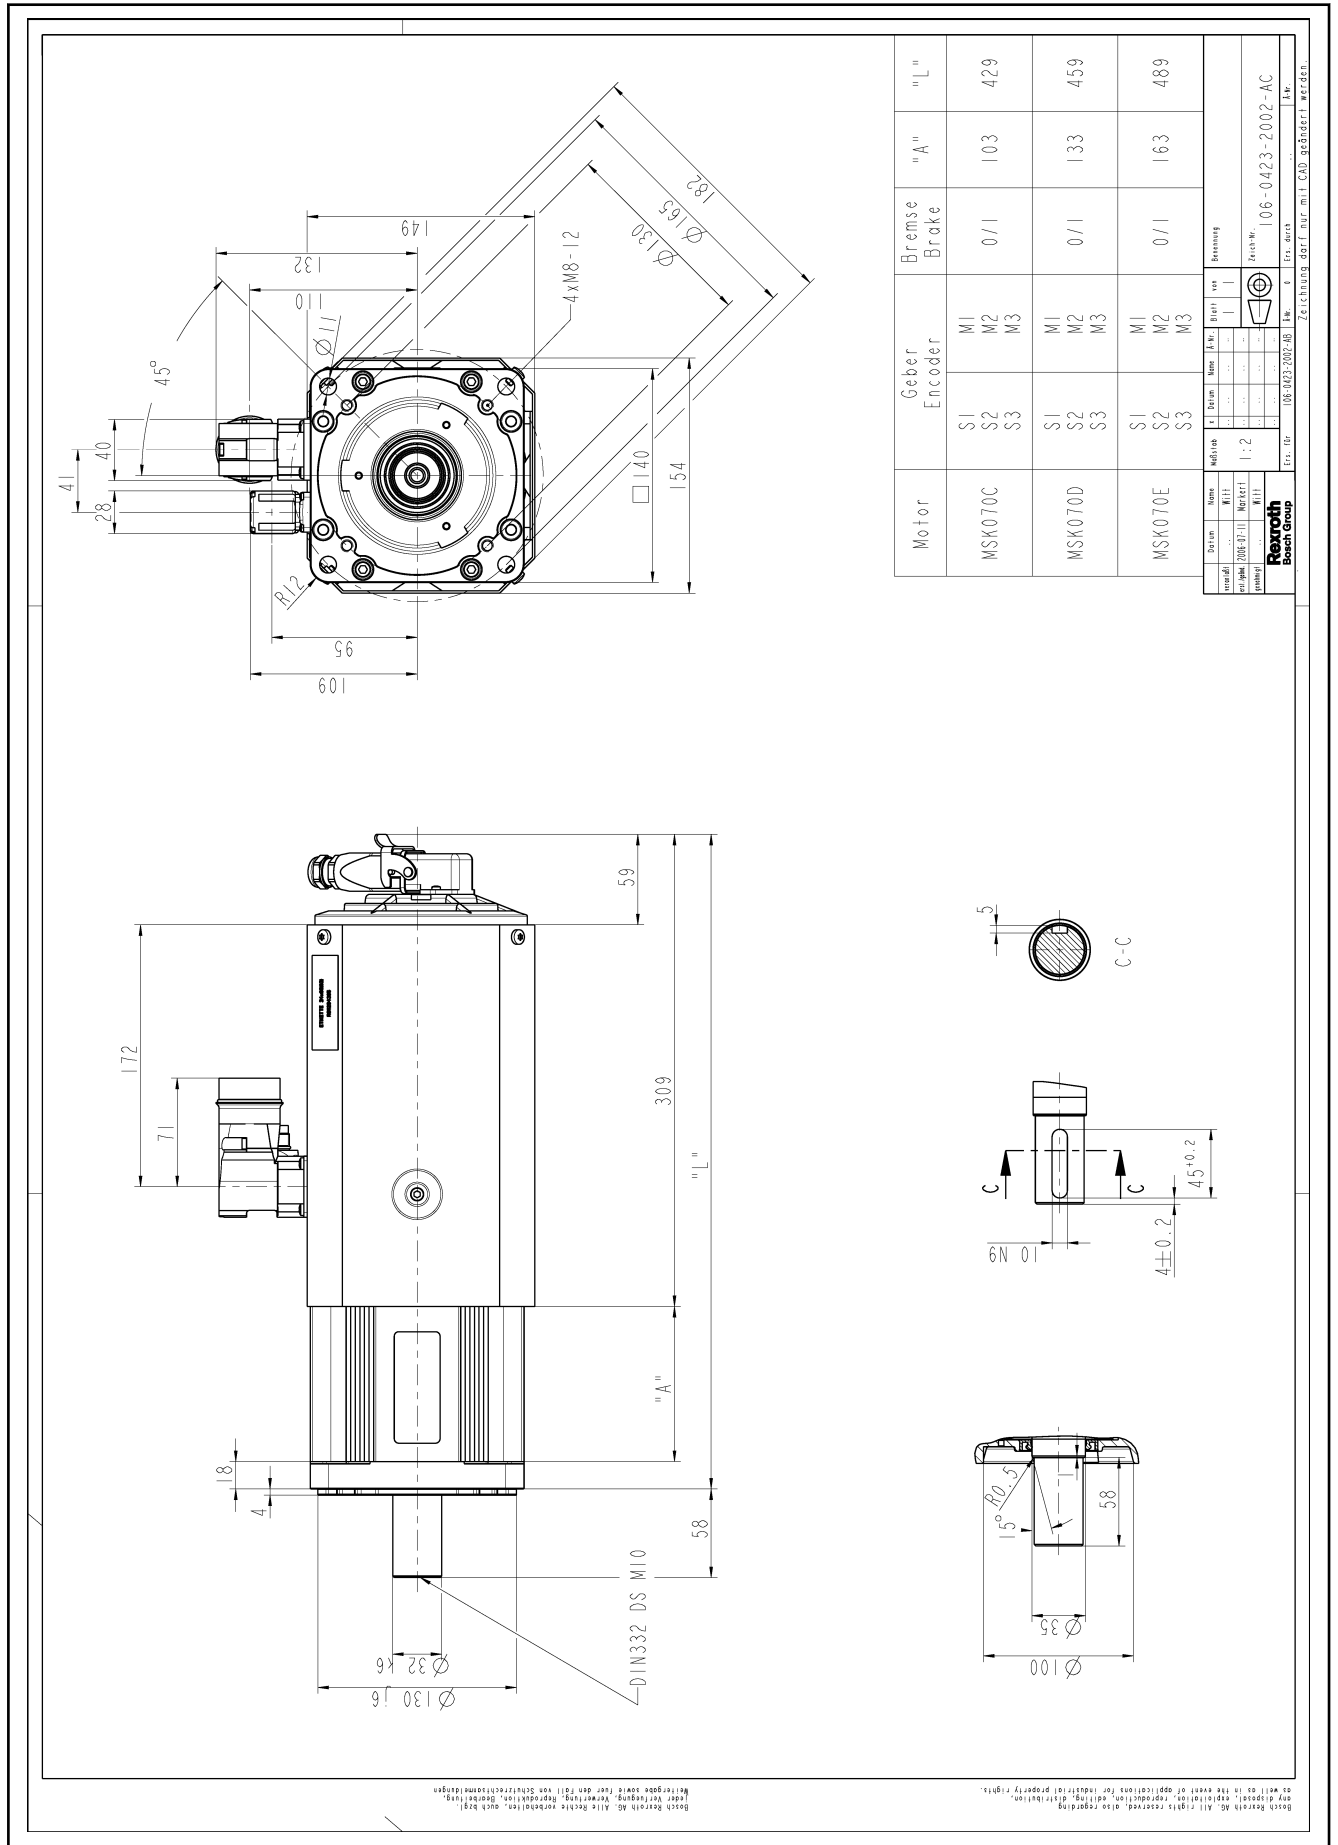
Dimension sheet MSK070 with axial fan unit
